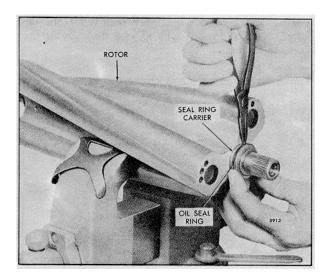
Removing Oil Seal Ring from Carrier (Turbocharged Engine Blowers)
